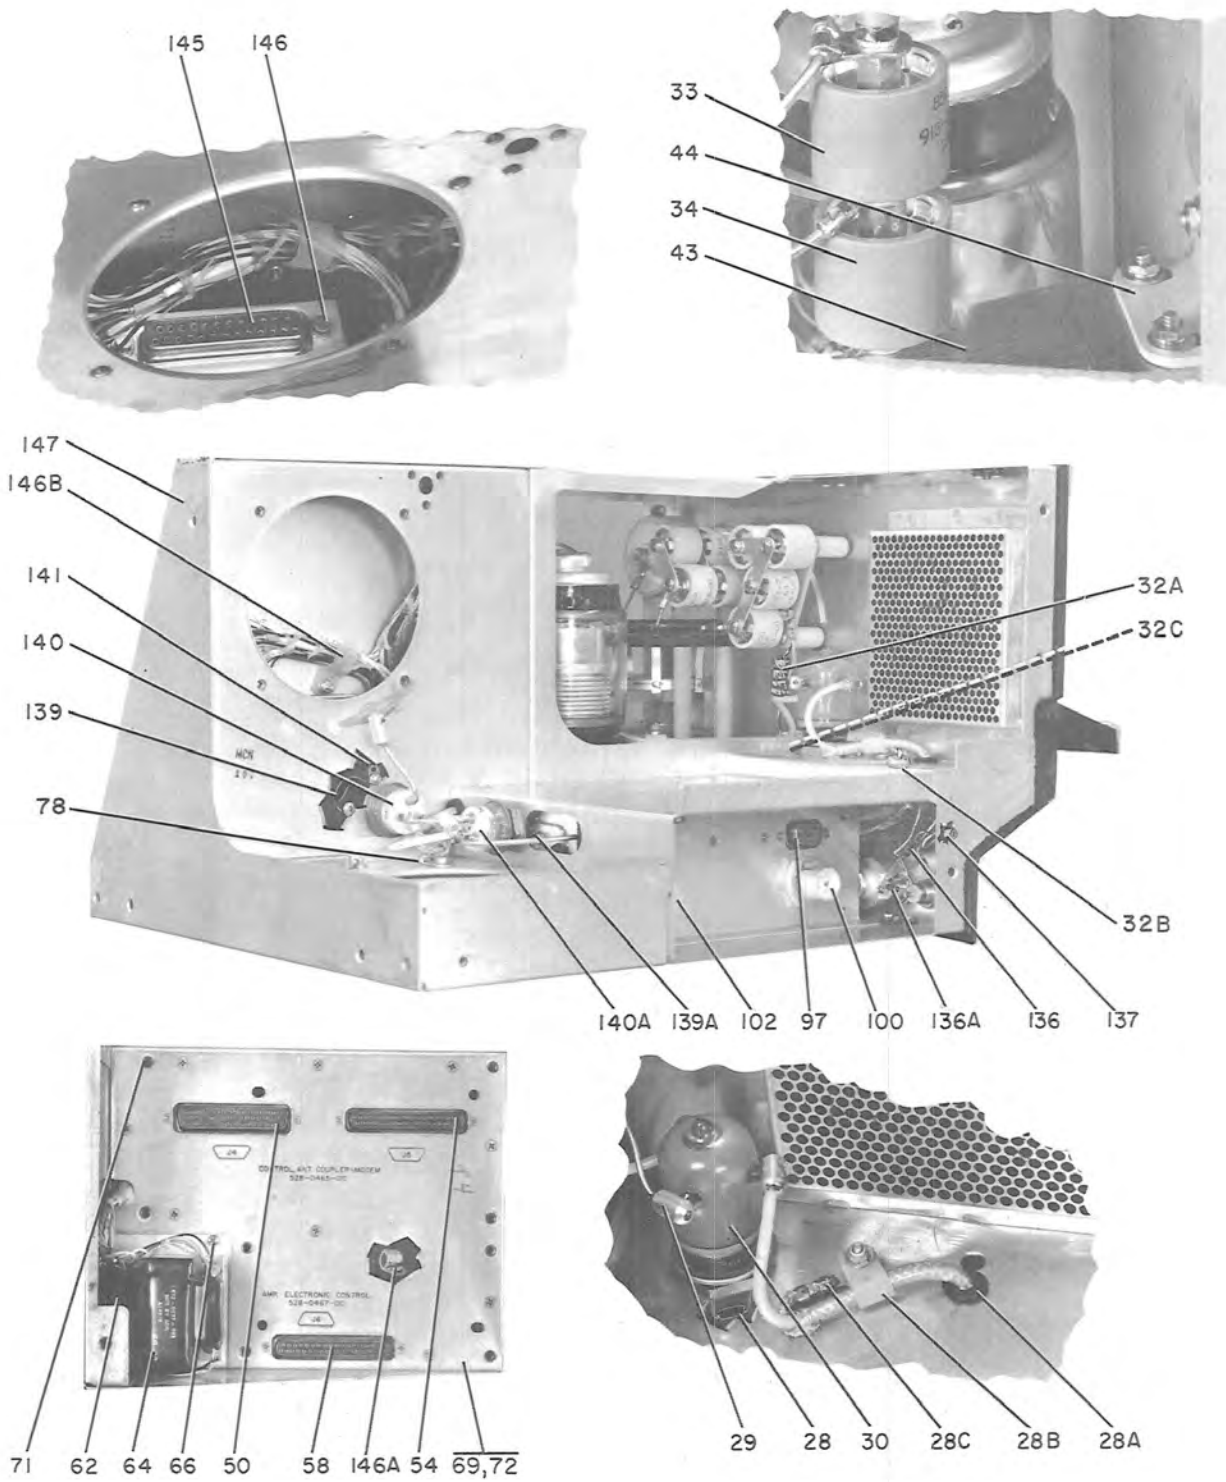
Electrical Equipment Chassis (Sheet 2 of 2).
